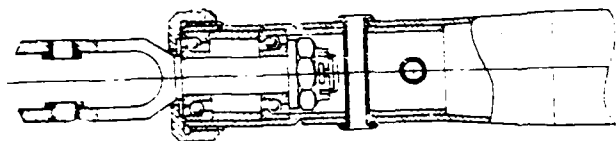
Constructions/designs of hinged element of rod/thrust: 1 - being pulled forked cap; 2 - radial thrust ball bearings; 3 - tube of thrust.
